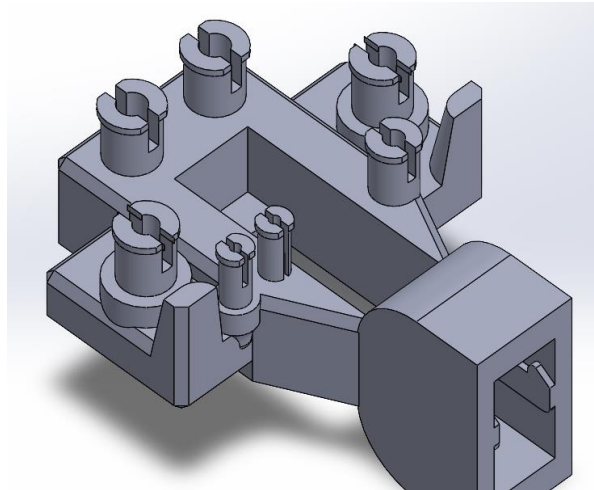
The CAD model of the Robotic Arm's Arm. There is a slot that corresponds to an extrusion in the Rotating Base Piece which the Arm rotates about, and a slot on the other side which a Servo's included gear attaches to.
